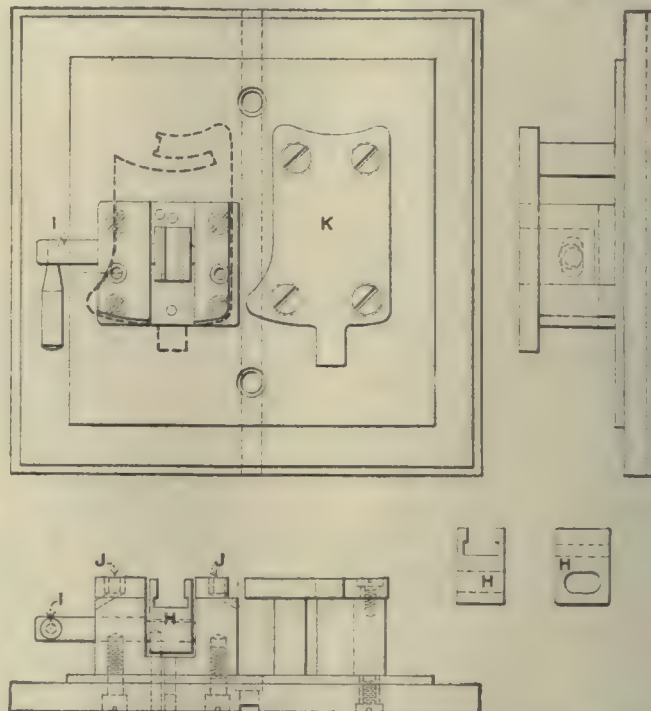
THE FIXTURE FOR PROFILING THE OUTER SHAPE
